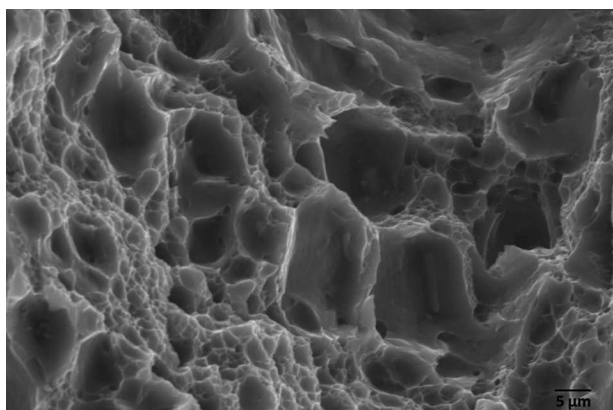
Higher magnified image of the fracture surface shown in Fig. 196. Note fine and coarse dimples throughout
